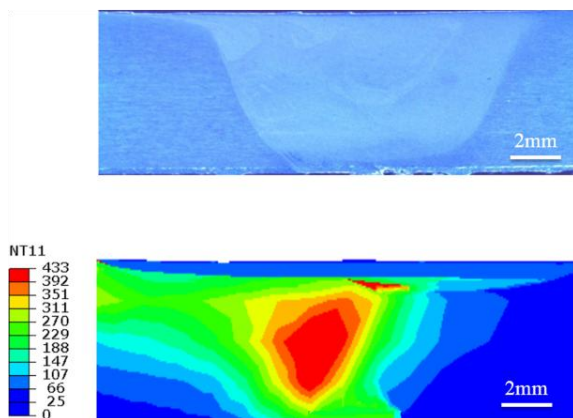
Experimentally and numerically seen weld zones at 950 rpm with no defects
